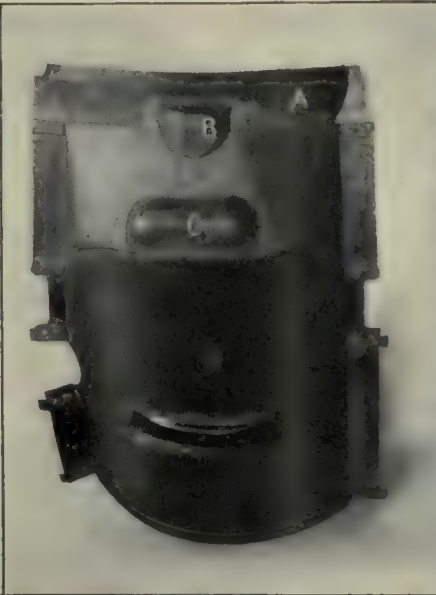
PARTLY FINISHED PAN, SHOWING PARTS
